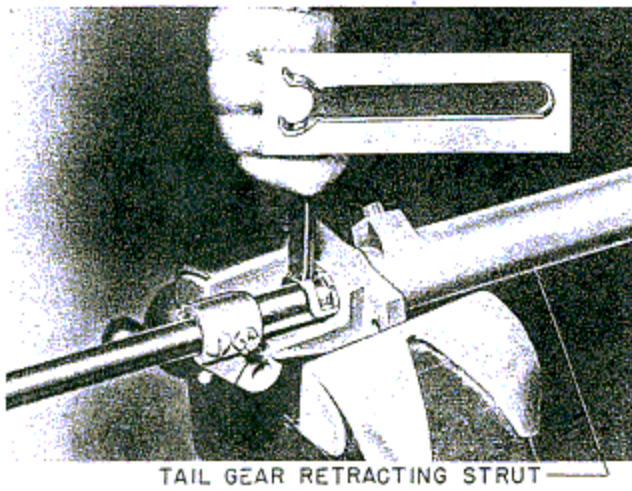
Cylinder Bushing Spanner Wrench, P-10189
